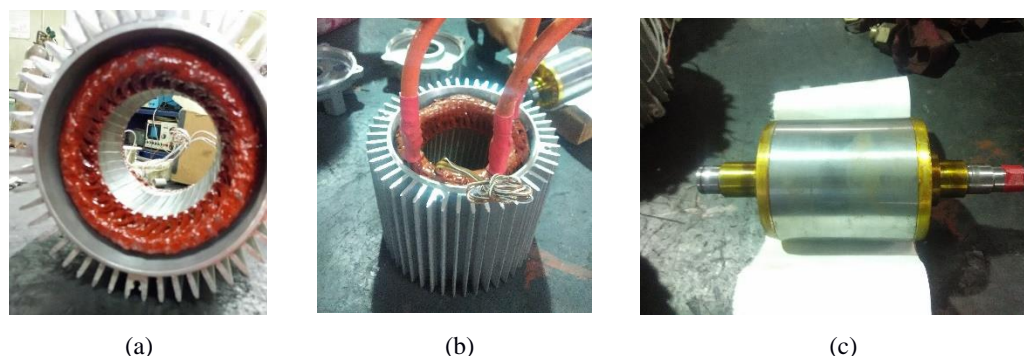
Proto build: a) DE stator; b) NDE stator; c) Rotor
